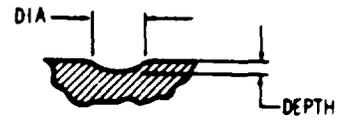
Compressor Rotor Blade Tip Blend Limits
